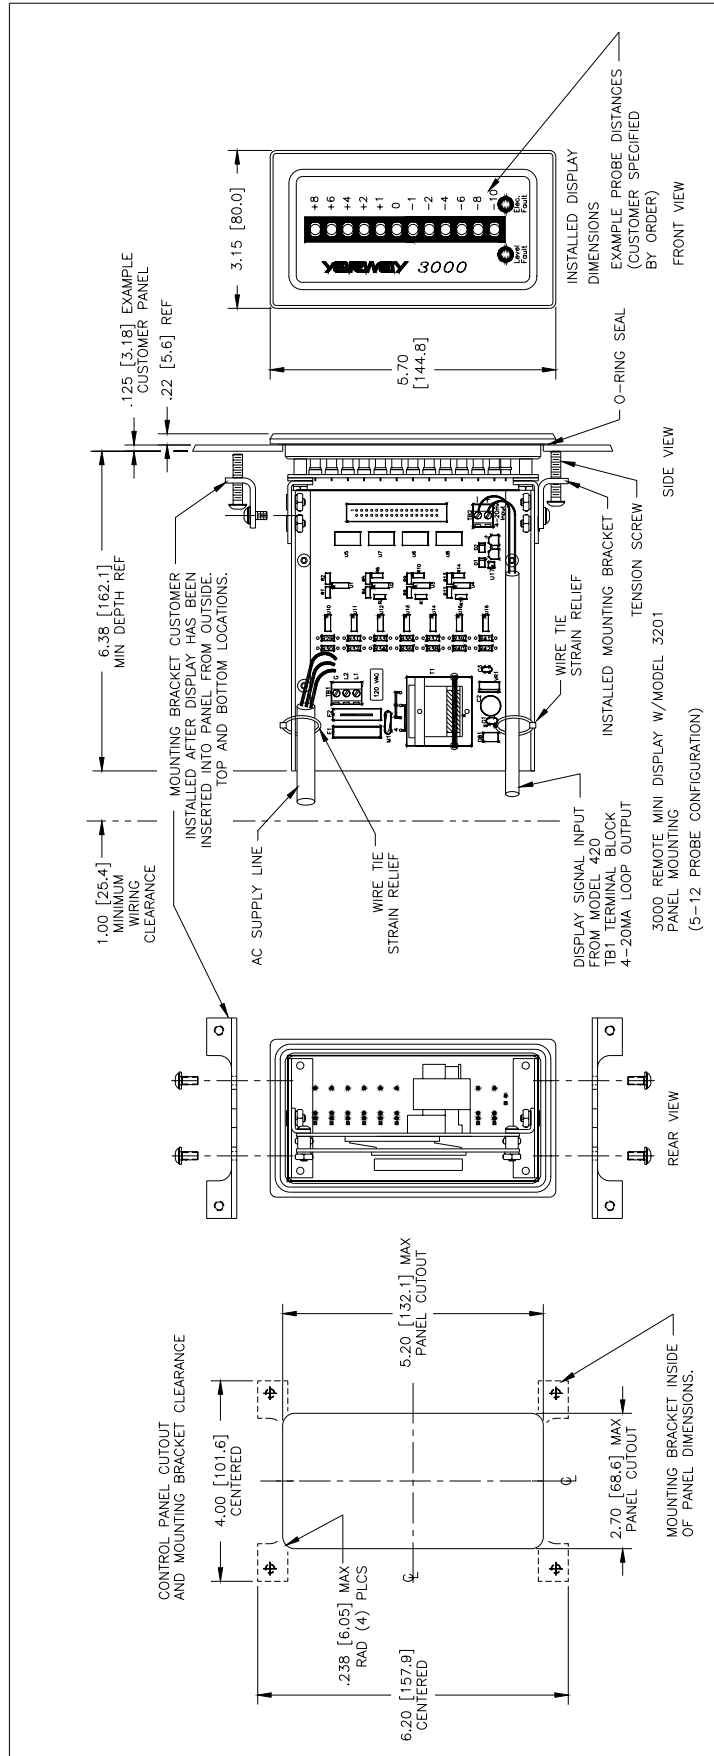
Remote Display – Panel Mount Mini 5-12 Probe
